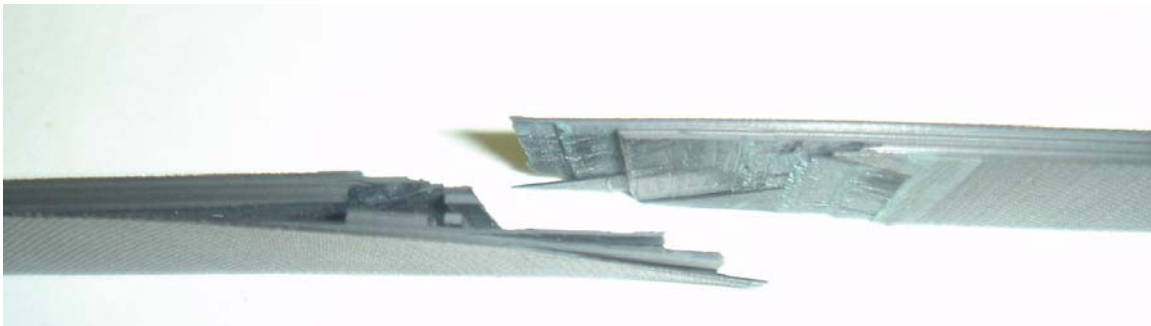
Profile of fracture surface of stepped-lap specimen #5.
